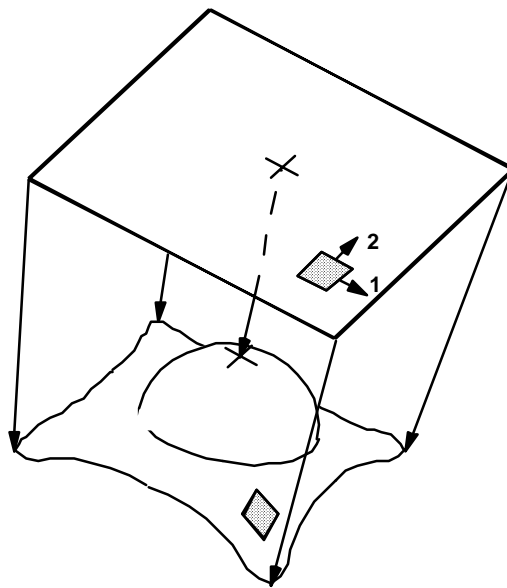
Shaping of a piece of fabric over a spherical surface; large local shear deformation is encountered
